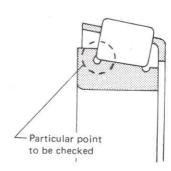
Inspect taper roller bearings (Sec 7)
